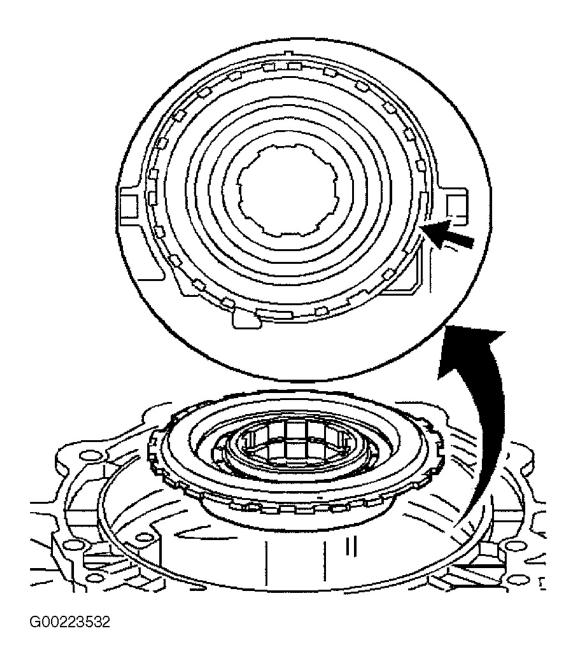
Installing Low-Reverse Clutch Steel Plates Courtesy of GENERAL MOTORS CORP.
